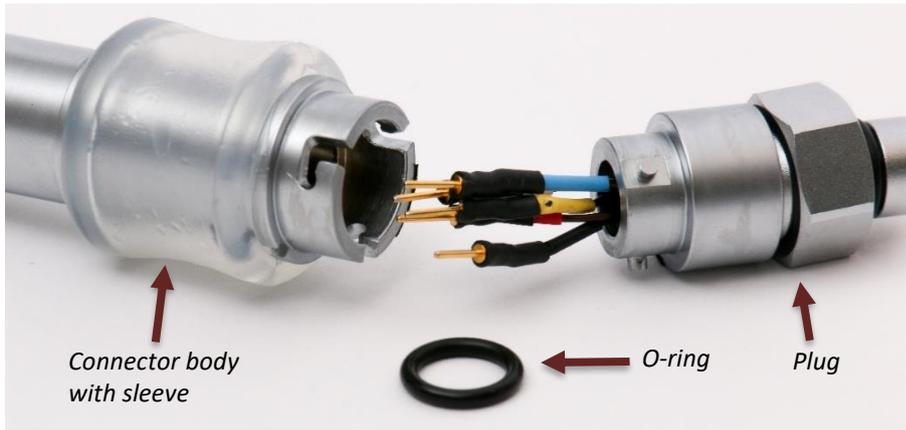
Shallow version In Situ UniAmp Connector disassembled. The plug is for STOX sensors, hence the five cables, most sensors have three cables.
